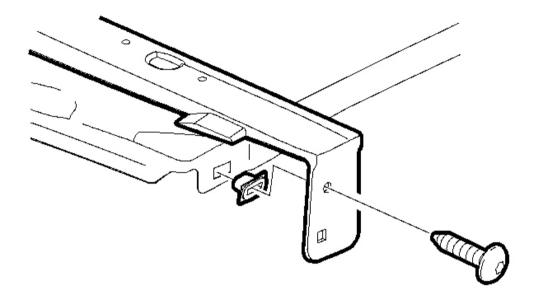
Removing/Installing Rear Mounting Screws To Luggage Carrier Courtesy of GENERAL MOTORS CORP.
